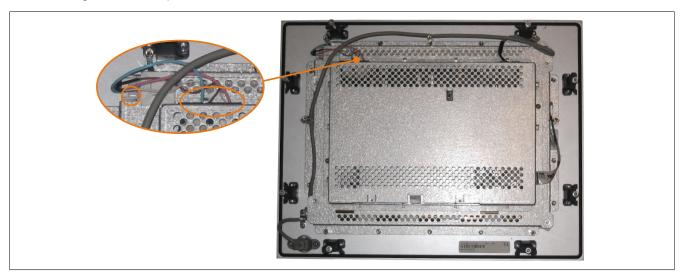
12.1" Automation Panels - Unscrewing and disconnecting
